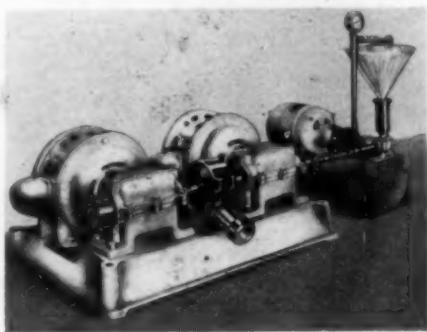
"Electronic Tornado" Welder for Derrick Clamps
